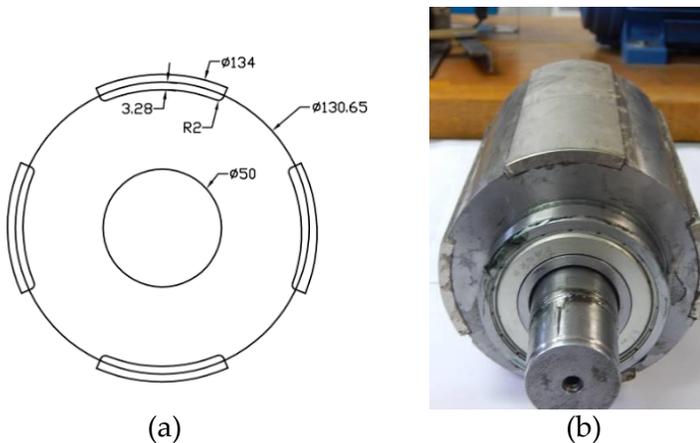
Smooth pole rotor – (a) Schematic drawings – (b) rotor assembled [6]
